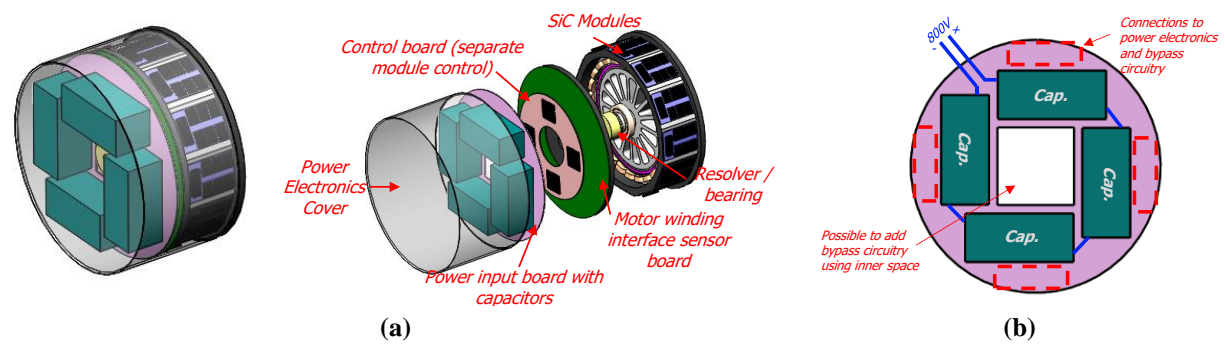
Conceptual IMD power electronics integration: (a) assembled IMD and exploded view showing major components; (b) power input board showing series capacitor connections.
